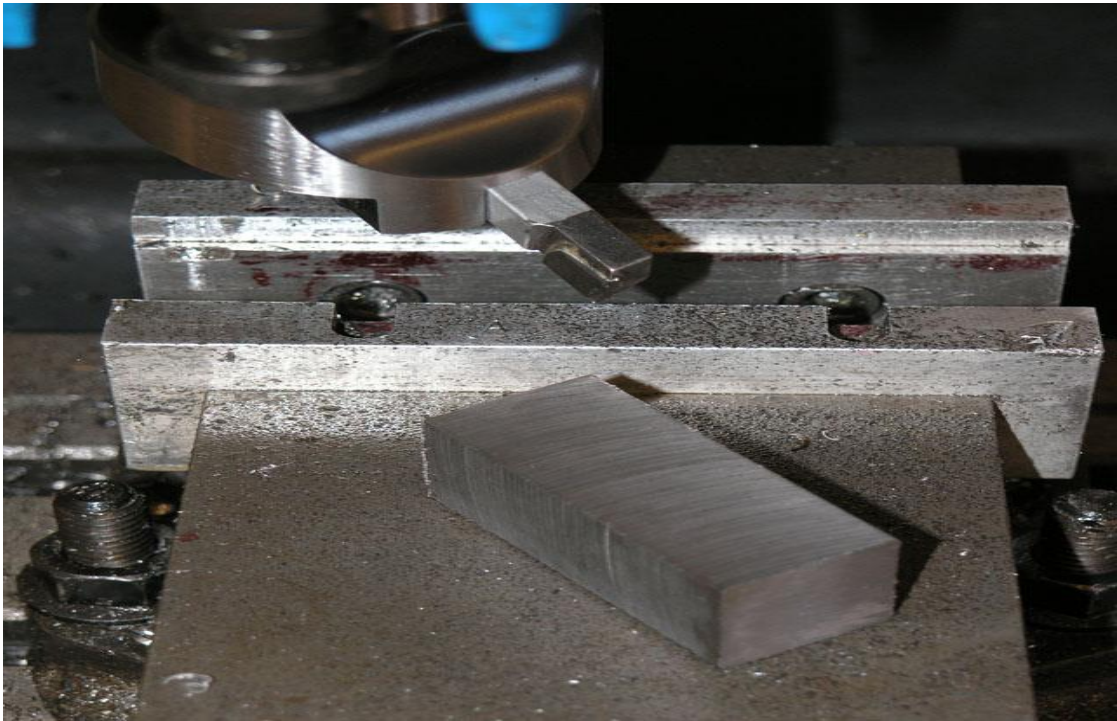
A fly cutter and an off-the-shelf brazed carbide lathe tool which is used in the surface finish
